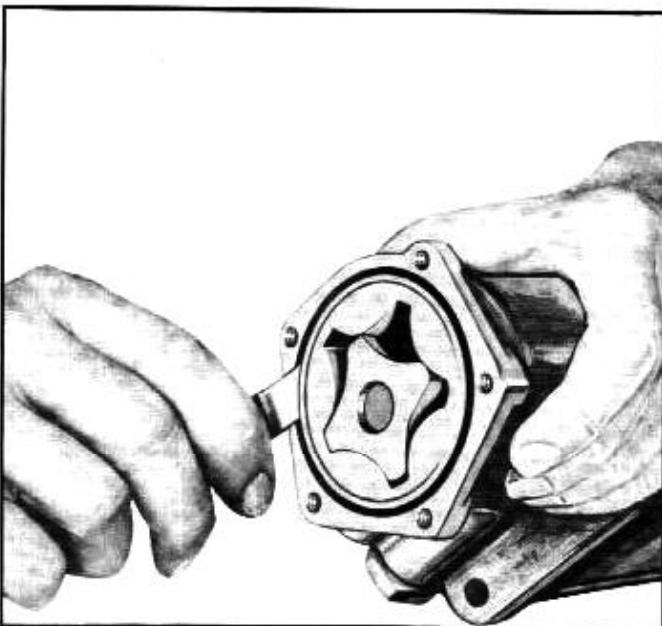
C-131—Checking Outer Rotor to Pump Body Clearance
